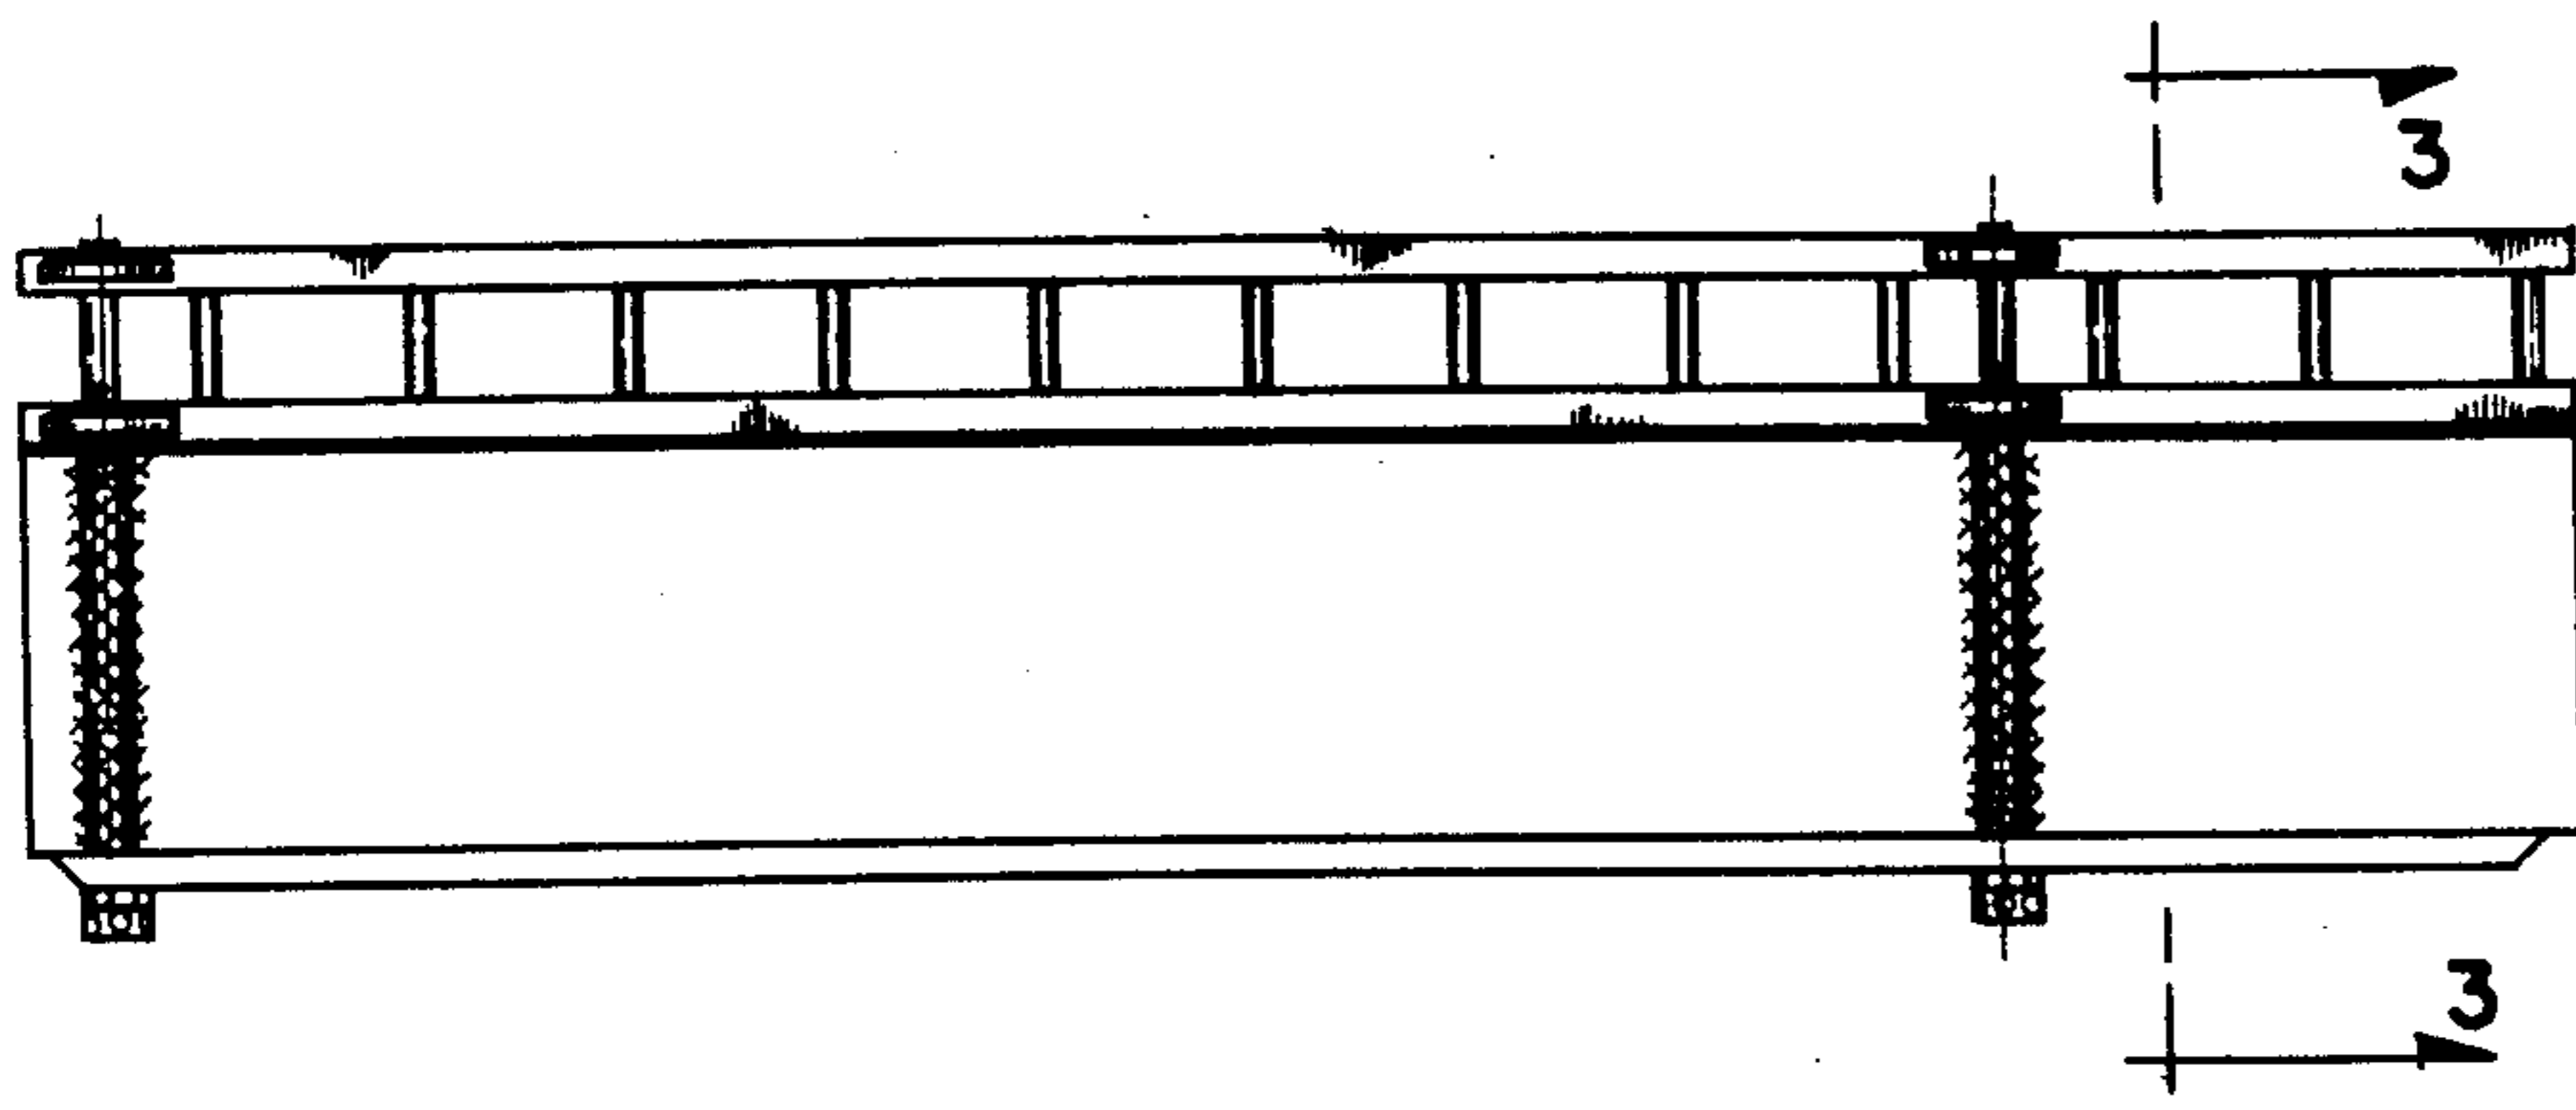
is a rear view of vehicle tie-down track assembly of FIG. 1.
